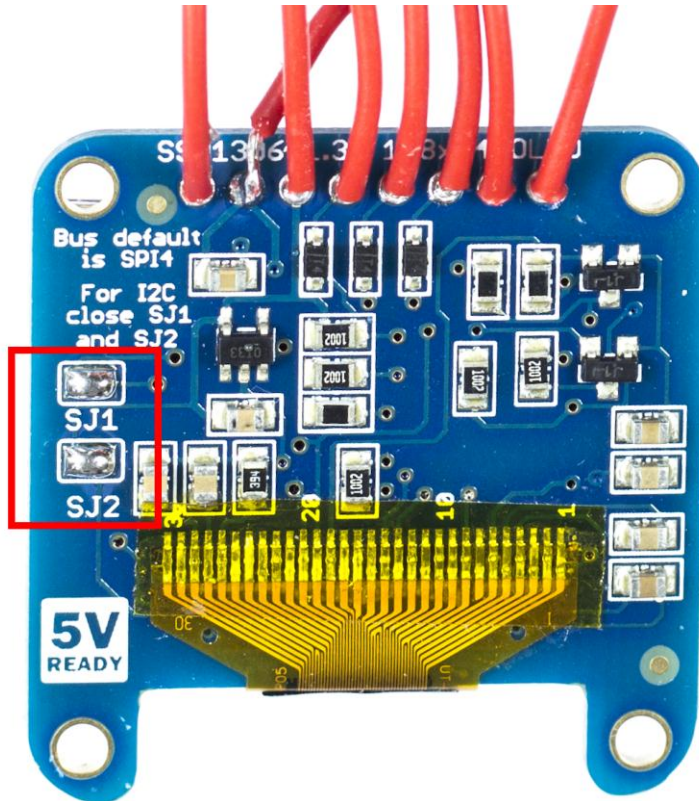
Soldering the SJ1 and SJ2 pad together
